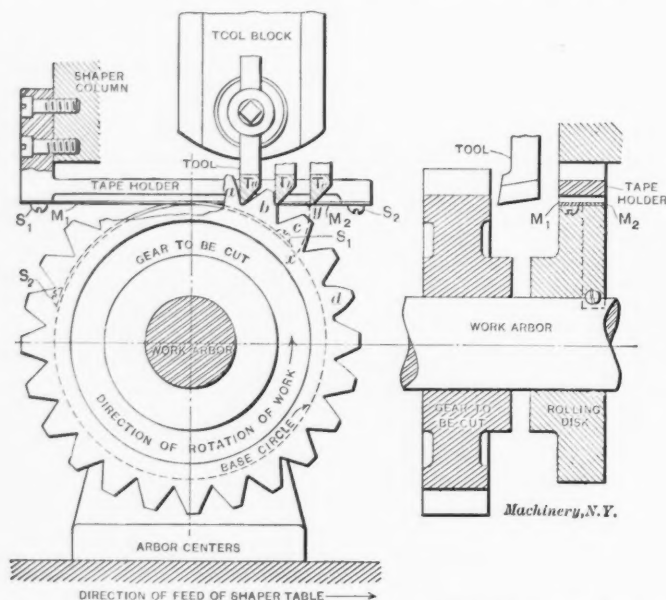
The Describing-Generating Process, by which the Point of the Tool is constrained to follow the Desired Outline.
